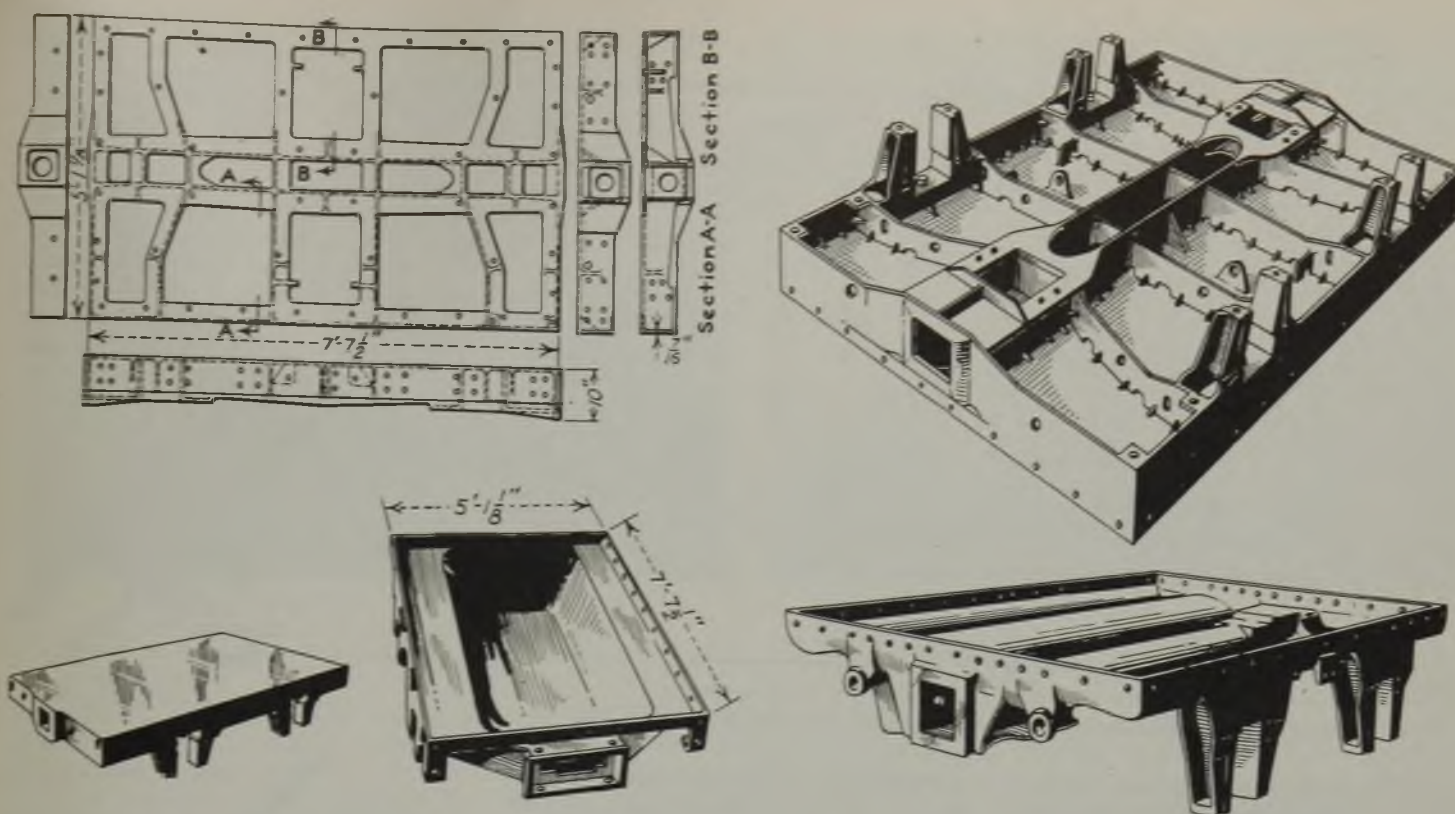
Showing (top row, left) details of original cast-steel underframe without pedestals or bottom; (right) bottom view of late-type flat-bottomed frame with upstanding flange; (bottom row left) early frame with integral pedestals and flat bottom; (center) "bathtub" underframe; (right) "corrugated-bottom" underframe
